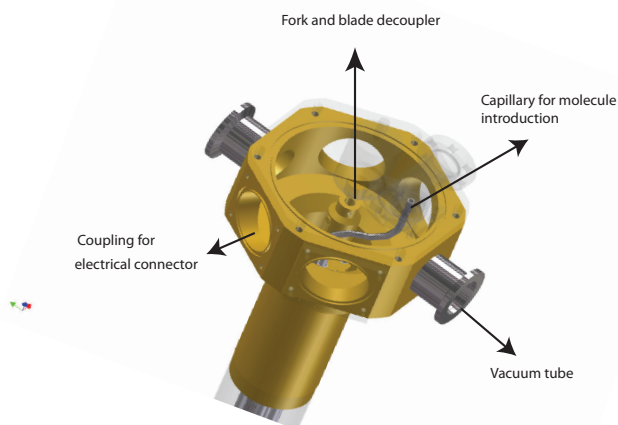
3D view of the head of the dipstick. In the new design a fork-blade coupling between the external rotation drive and the screw axis is put at the top of the screw axis. Two vacuum feed throughs are welded on the head of the dipstick, while electrical feed throughs are O-ring sealed. The second stage RT amplifiers are placed inside the head of the dipstick (not shown here).
